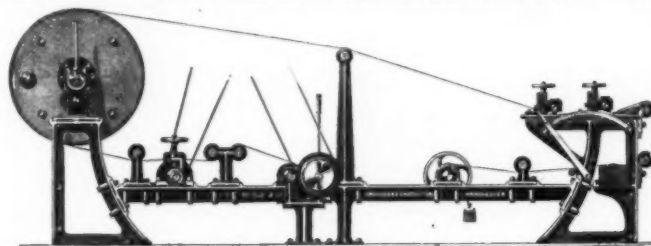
POLISHING, CURING, AND PASTING MACHINE.
